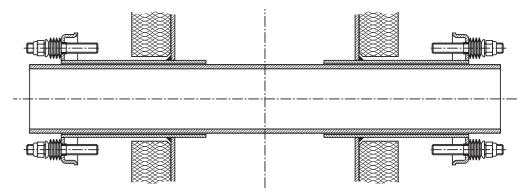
Auxiliary tube for aligning the flanges in measuring paths of up to 2 m (6.5 ft)
